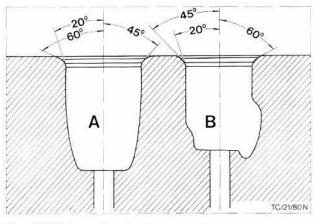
Valve seat angle. A – Inlet valve seat. B – Exhaust valve seat.
